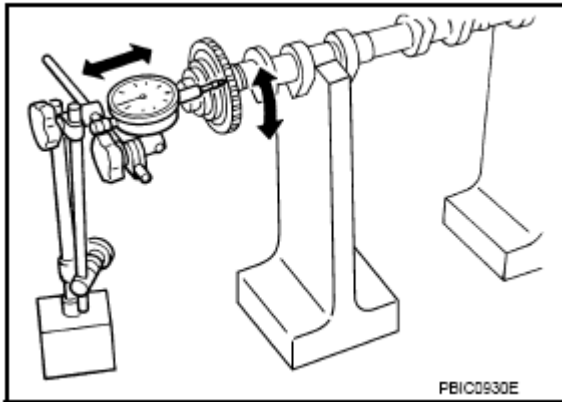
Measuring Camshaft Sprocket Runout Using Dial Indicator
